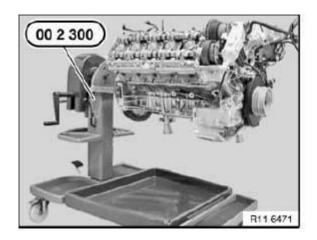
Securing Engine With Special Tool (00 2 300) Courtesy of BMW OF NORTH AMERICA, INC.
